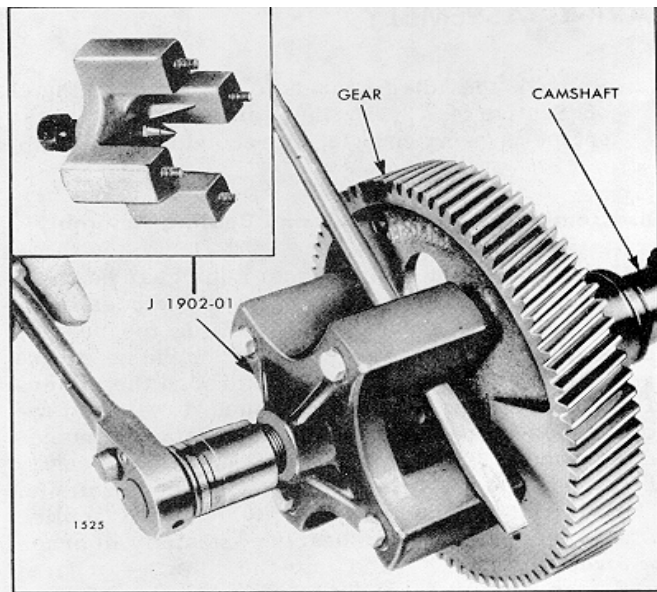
Removing Gear (Camshaft or Balance Shaft) with Tool J 1902-01
